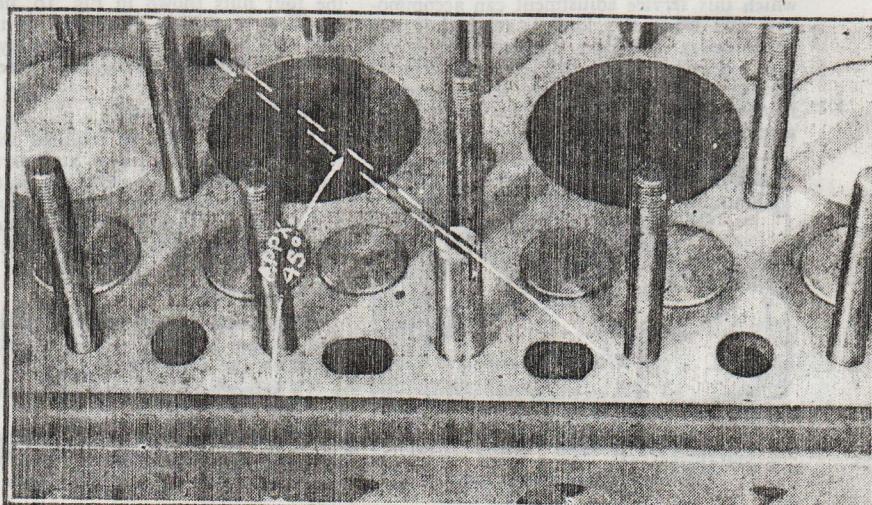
Position of offset and slot at upper end of distributor driver shaft with No. 1 cylinder at firing point.
